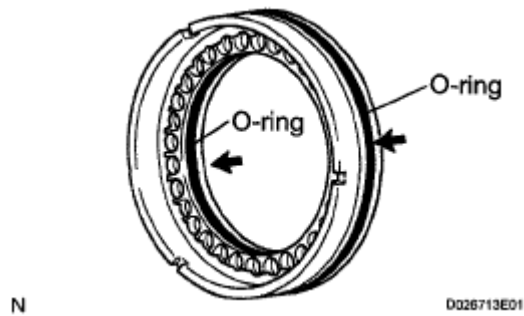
Locating 1st And Reverse Brake Piston O-Rings
